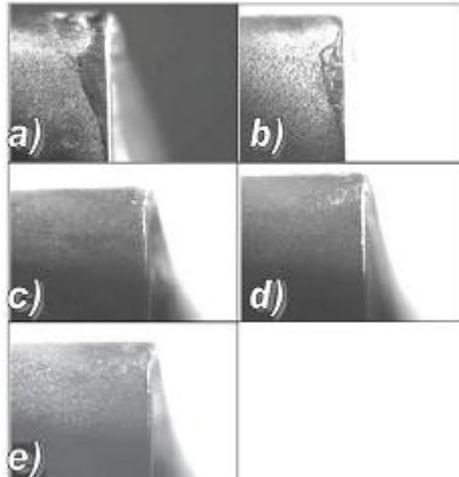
Photographs of the final flank wear for a) uncoated tool, b) TiN coated tool, c) TiN/Al₂O₃ coated tool, d) Al₂O₃ coated tool and e) TiC/Al₂O₃/TiN coated tool.
